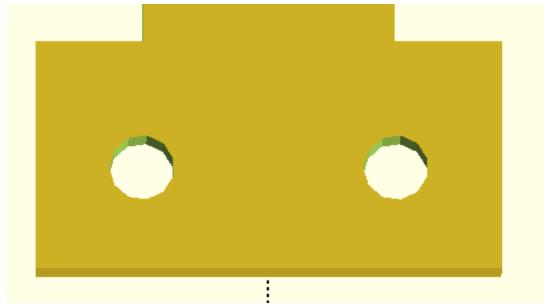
Base component containing two cylindrical holes for attaching a bracket.
